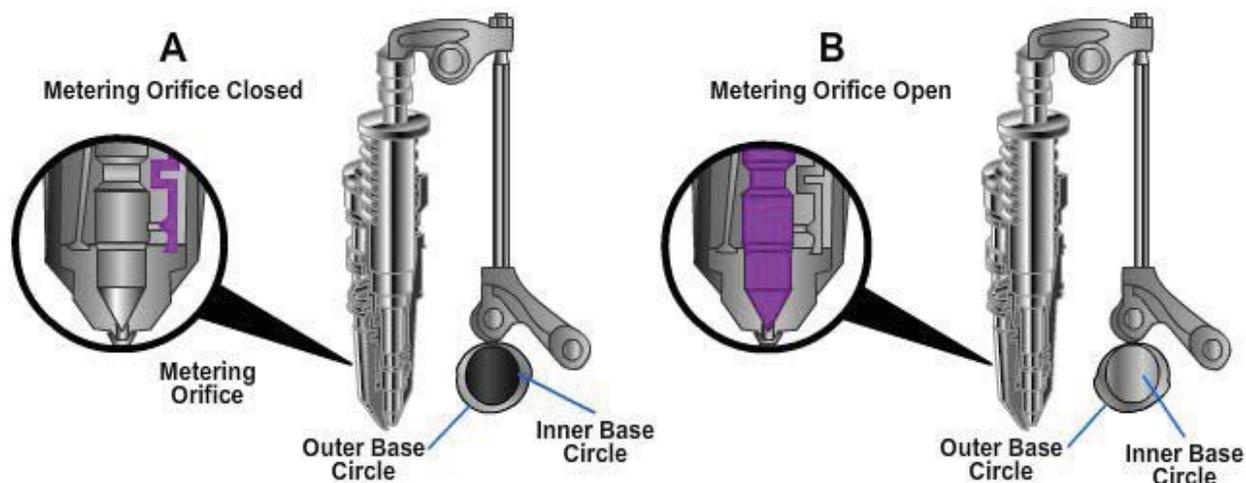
A PT fuel system, the camshaft actuated injector.
